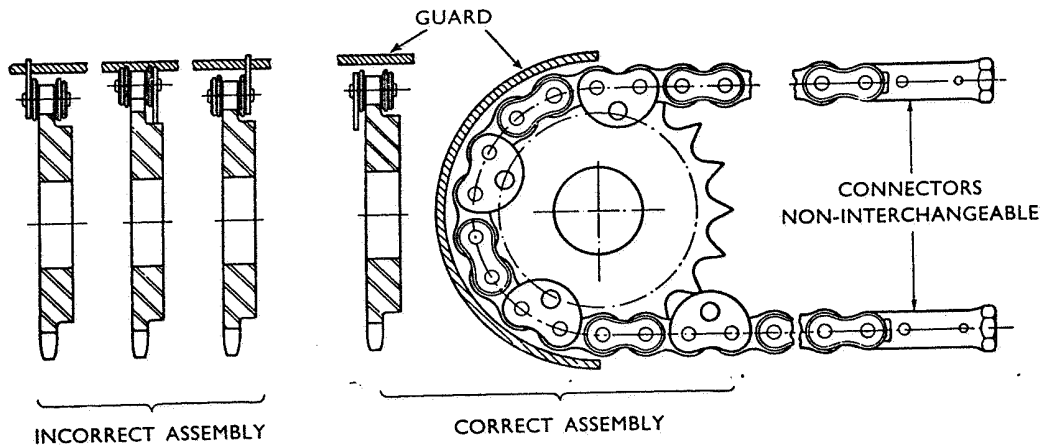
NON-REVERSIBLE CHAIN ASSEMBLY
